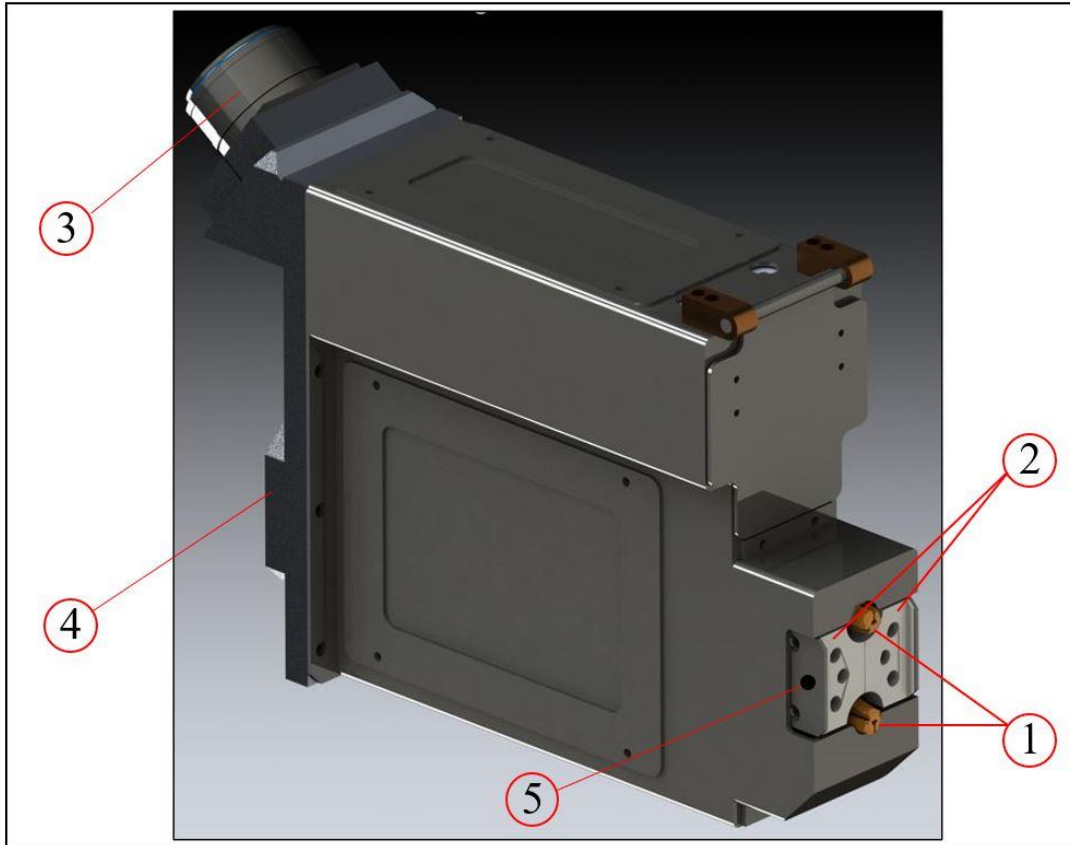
Overview of the robot tool for welding pins with tags. 1) tweezers or claws; 2) reaction components in aluminum alloy 1060 H12; 3) support for input of power and signal cables; 4) fixing plate to the robot's wrist; 5) indication of the place where the type k thermocouple was fixed.
